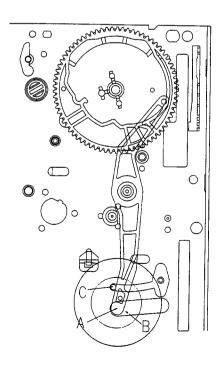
DATUM POSITION OF RELAY LEVER & CAM GEAR
